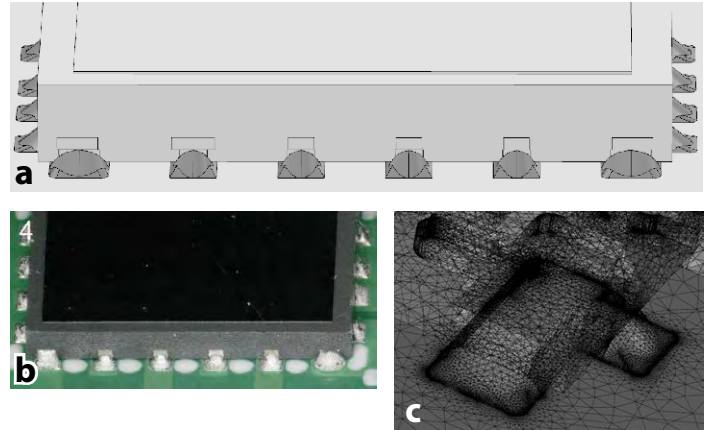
(a) shows the sidewall fillets in the COMSOL simulation. (b) shows the side view optical image of the sidewall fillets post assembly. (c) shows the fine meshes applied to the gate corner solder joint.
